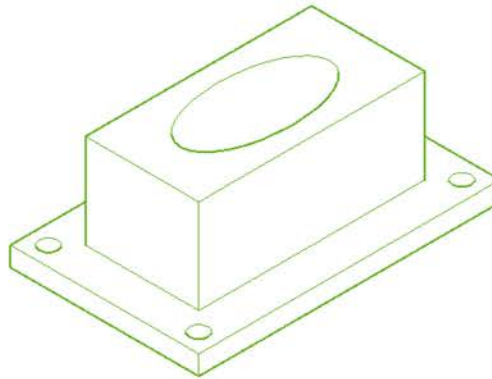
Example – Chamfer and Fillet – isometric view – the model before using the Cylinder, Fillet and Chamfer tools
